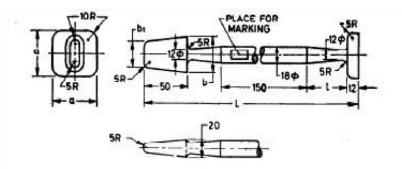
Dimensions and Weights for Combined Tamper and Rammer
